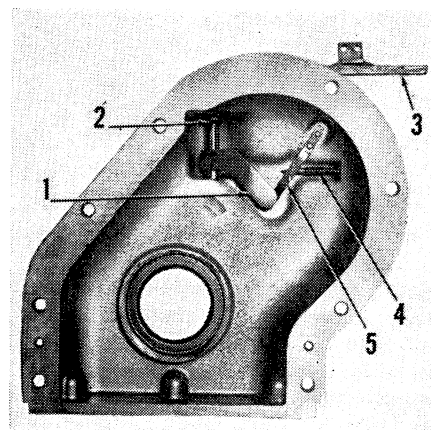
Pony governor lever shaft assembly in timing gear cover.
